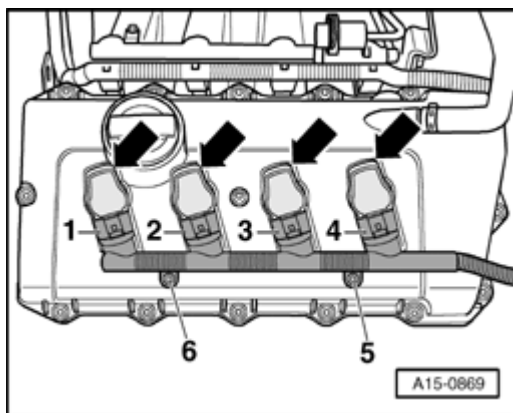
Removing Bolts On Left Cylinder Head, Disconnecting Electrical Harness Connectors & Removing Ignition Coils
